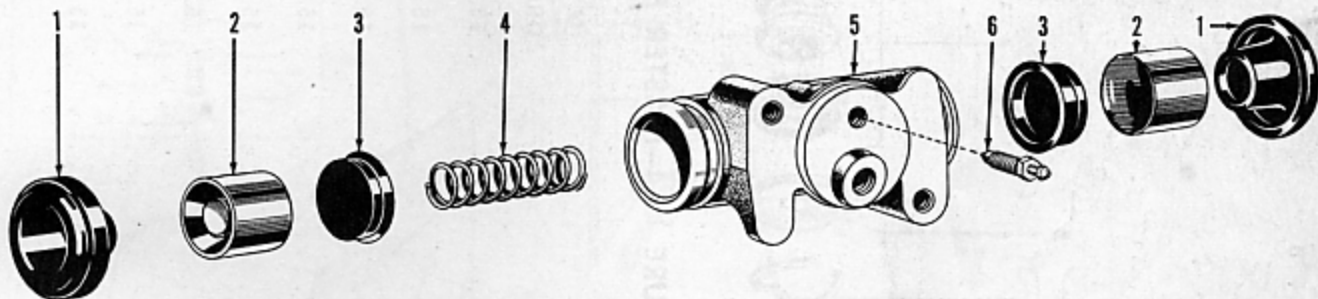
REAR WHEEL BRAKE CYLINDER—EXPLODED VIEW
